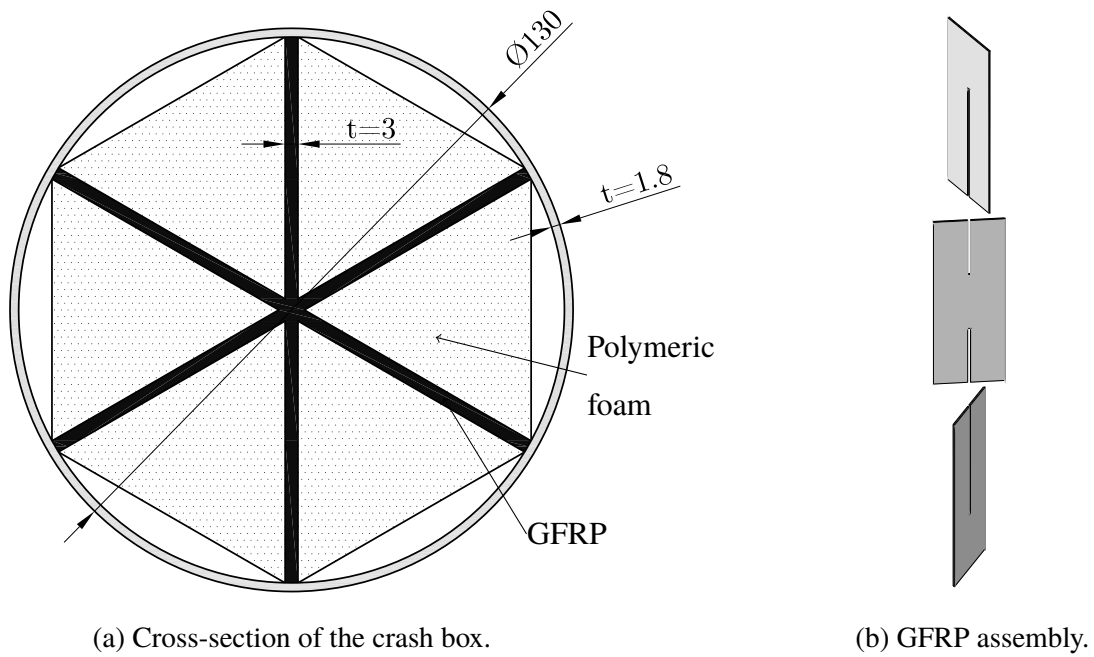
Cross-section of the proposed crash box made of aluminum (gray), polymeric foam (dotted) and GFRP plates (black) and assembly scheme. Dimensions in millimeters.
